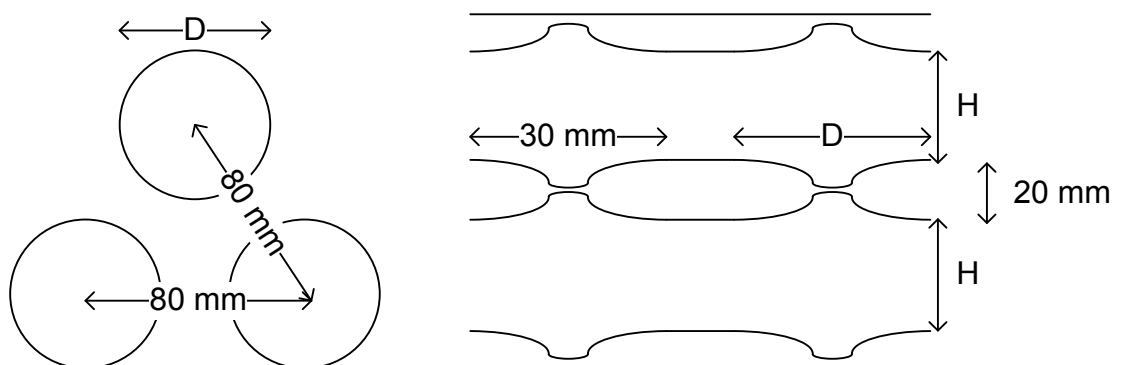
Flow model assembly, dimple plate between two formed Perspex sheets
